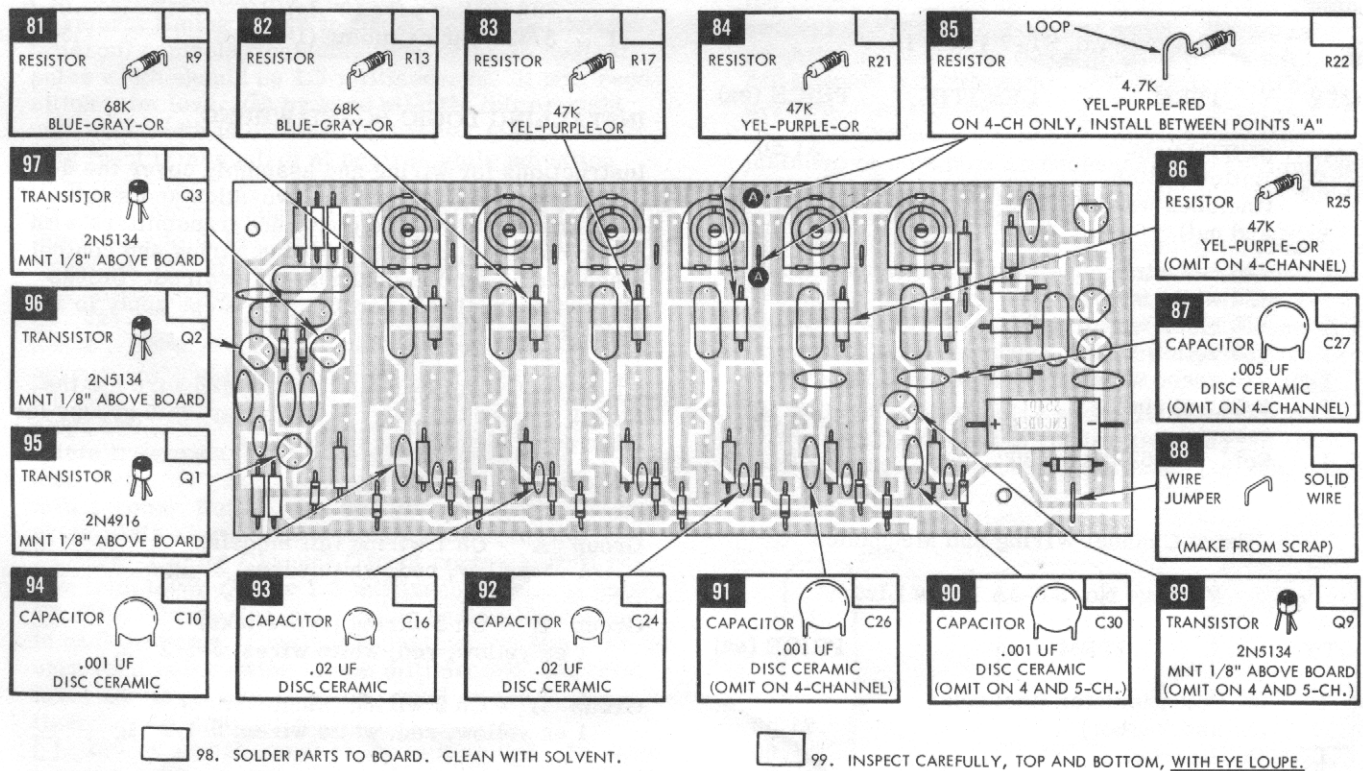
Logic Board Assembly (Sheet 5 of 6)
